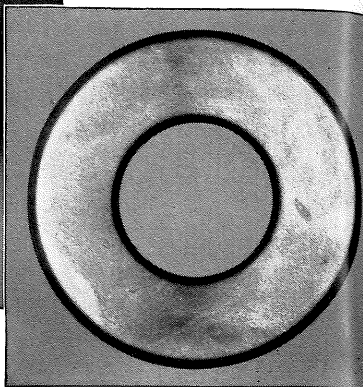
A. Cross Section of Headstock Spindle for Series "T" Lathes. Dark portion shows depth (3/64") of carburized and hardened bearing surfaces
